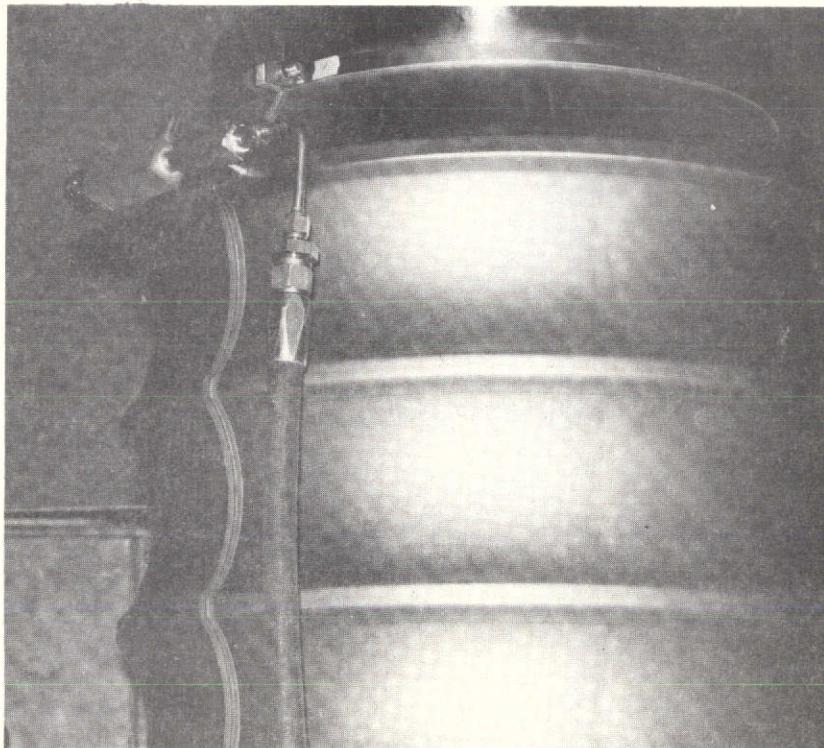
Assembly #1, 508 mm (20 in.) Hg Vacuum Pressure
